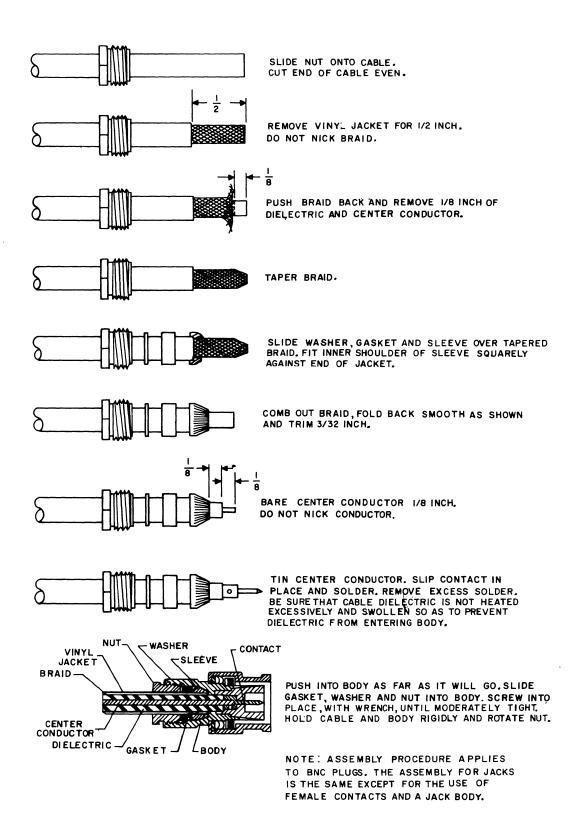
Assembly of UG-88/U Connector to Coaxial Cable
